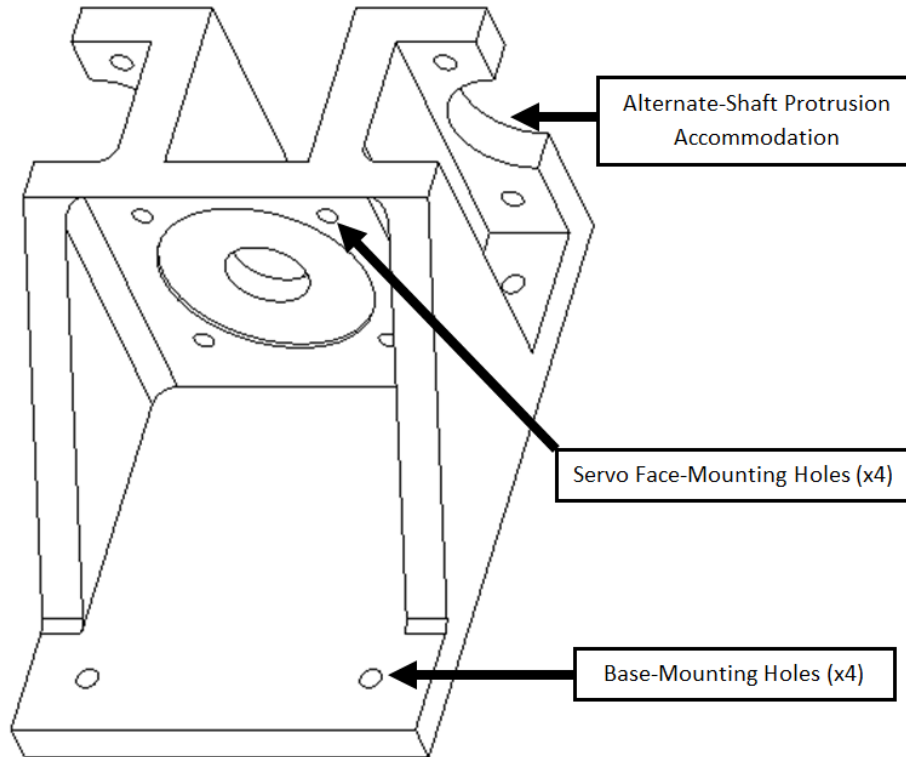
Direct-Drive Cam-Servo Test Machine Servomotor Mounting Fixture Design
